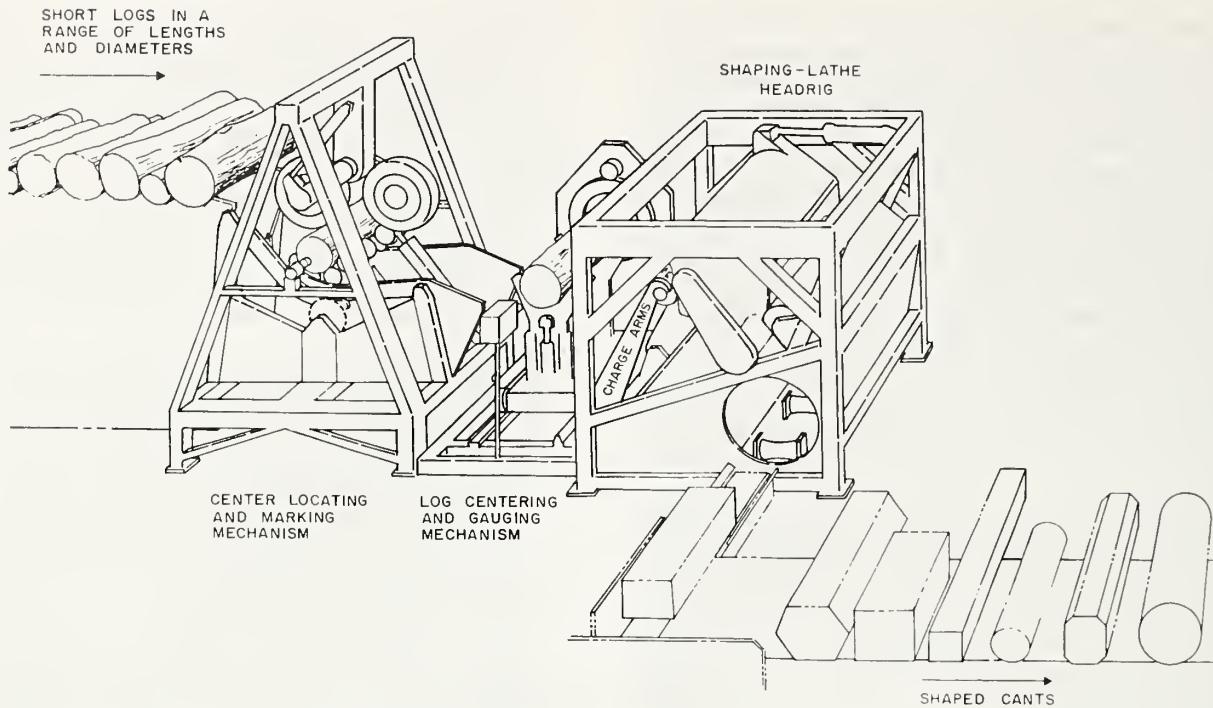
Shaping lathe headrig designed to produce cylinders or polygons of various dimensions. For the application described in the text, all logs would measure 100 inches long and would be machined into cylinders. Machine residue is in the form of flakes suitable for OSB. (Drawing after Koch 1985, p. 1921.)
